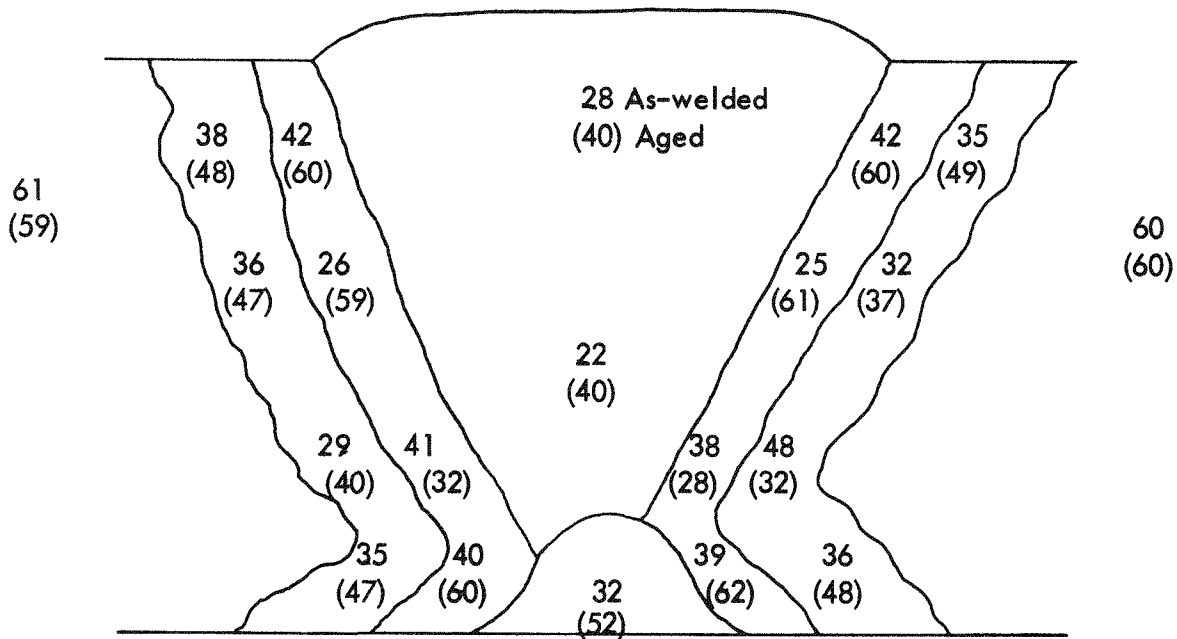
ROCKWELL 30T HARDNESS OF 6061 WELDMENT JOINED BY THE AUTOMATIC MIG PROCESS WITH BACK PASS
